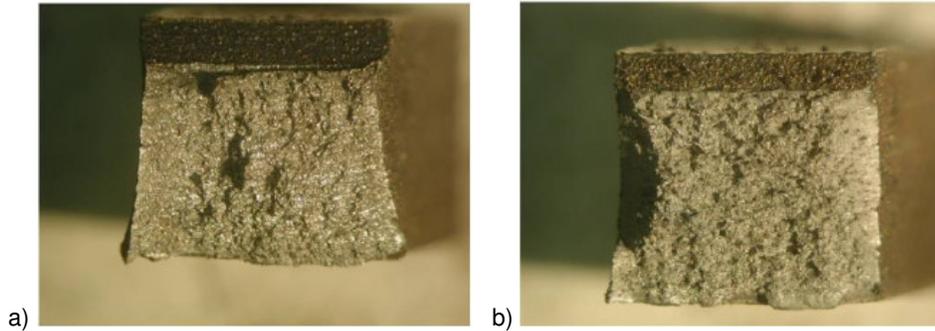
Fracture surfaces of Charpy specimens a) without and b) with aging (5h at 490°C)
